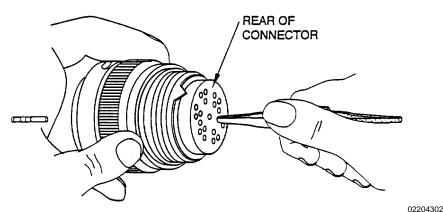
Contact Removal, Broken Wire Contact, Rear Release (Sheet 2)
